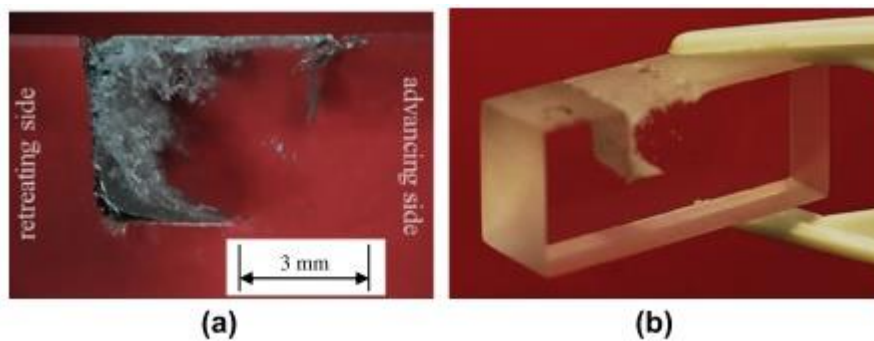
Two (a) and three (b) dimensional images of PMMA weld [46].
